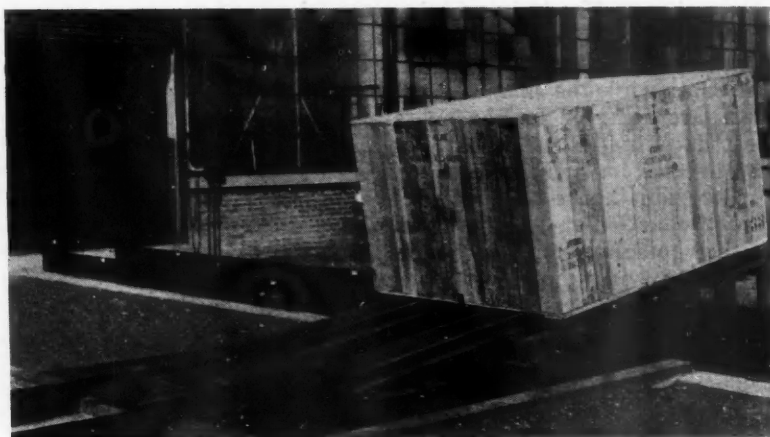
A moving work bench in the export building. This slat conveyor facilitates the building of sides for crates and boxes
